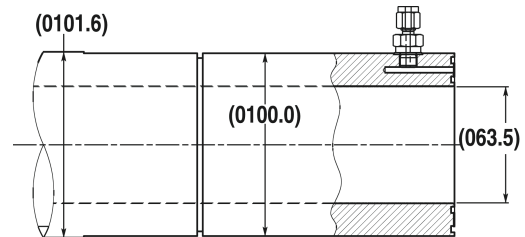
Outline drawing of the machined end of a double seal waveguide showing provision for monitoring for leaks in a seal.
